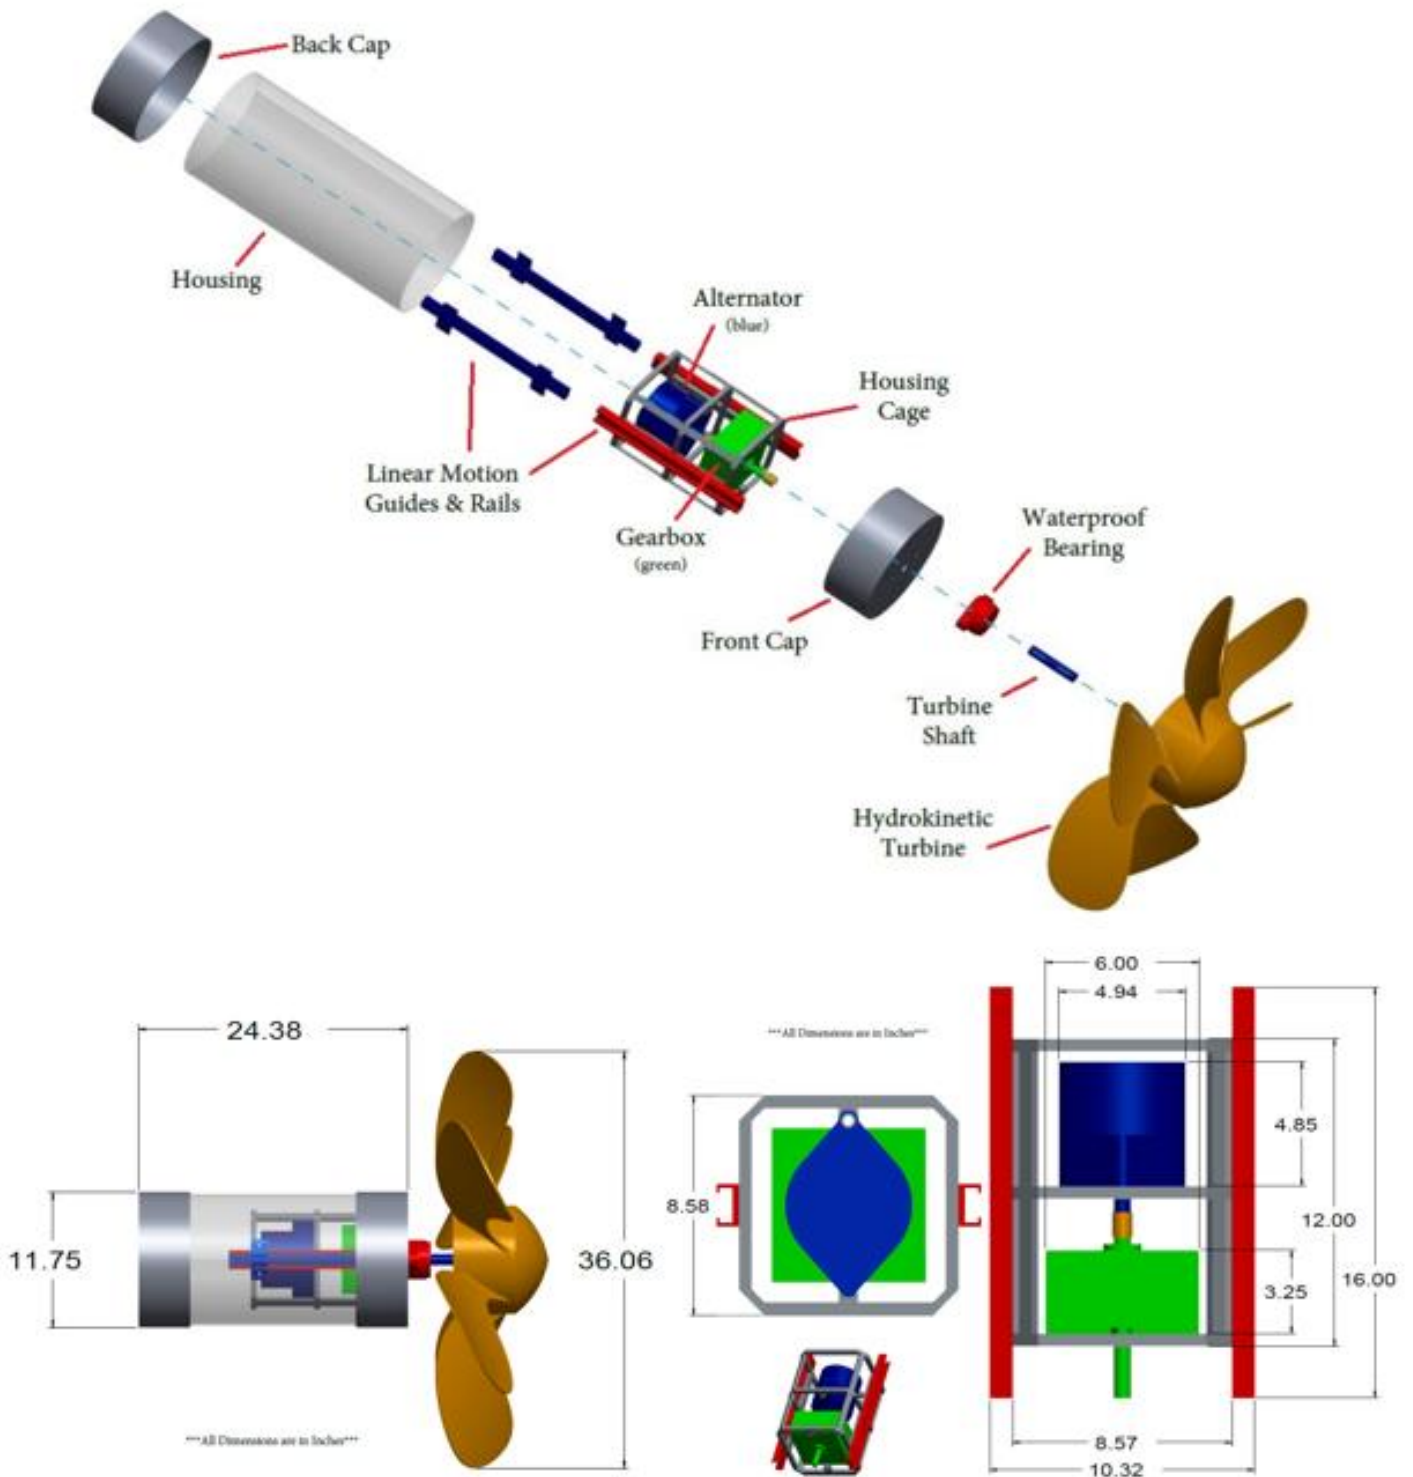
Detailed CAD of the final design (all dimensions are in inches)
